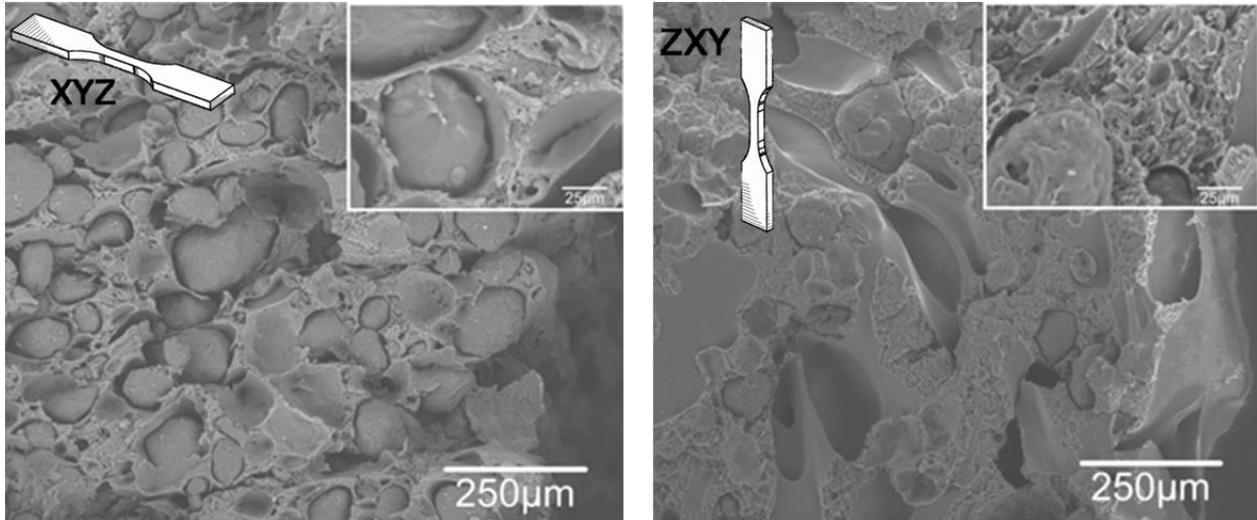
The intermingling in print rasters is also apparent on the fracture surfaces of tensile test specimens printed in different orientations from [34].
